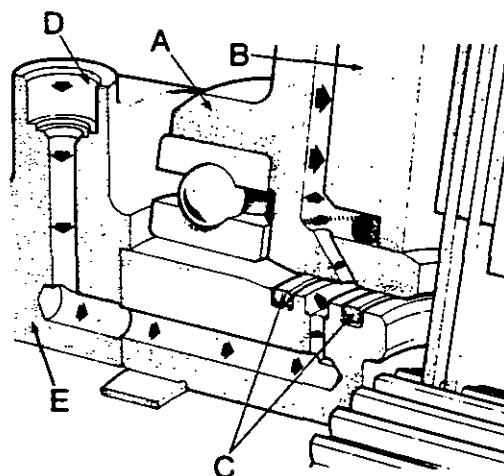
CLUTCH CYLINDER OIL SEALS
